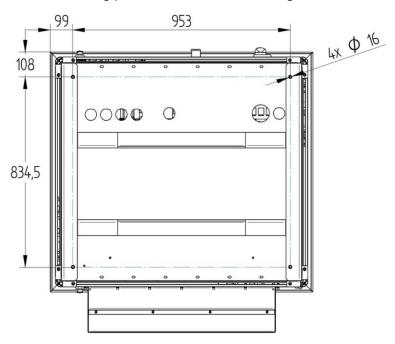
shows the mounting points. All dimensions are given in millimetres.
